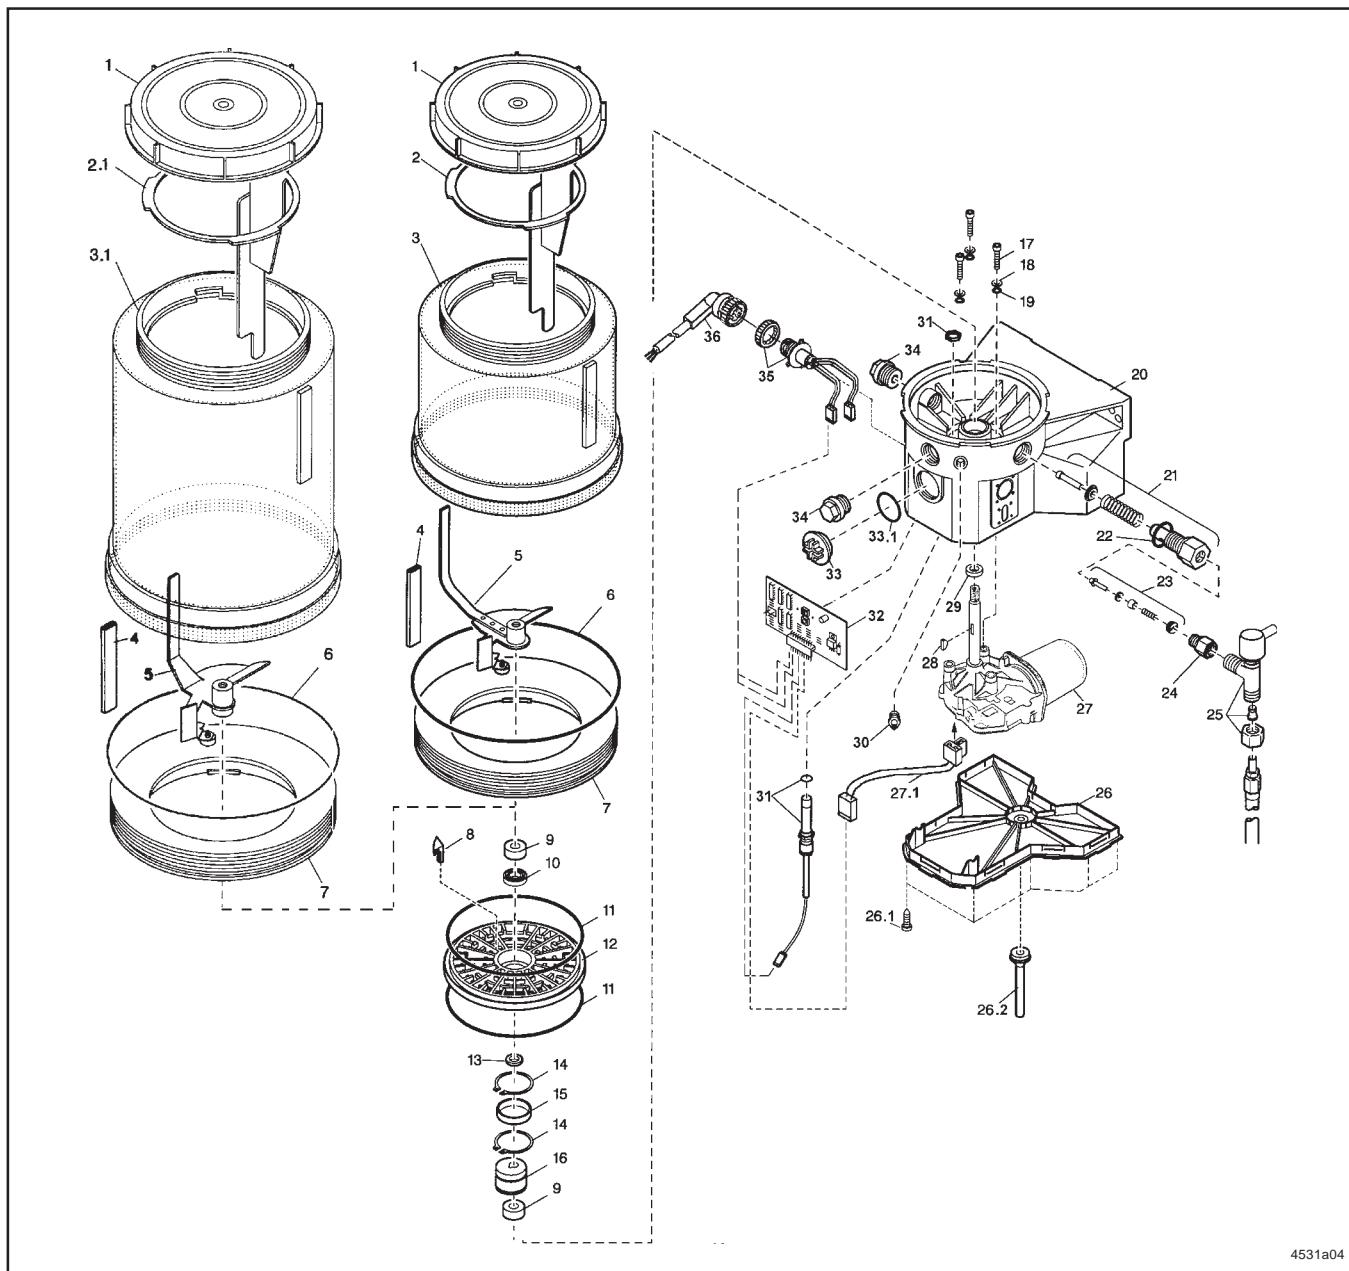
Explosion view for P 203 -4XLBO/8XLBO-K.-12/24-1A7.16-V10-V13, V20-V23
